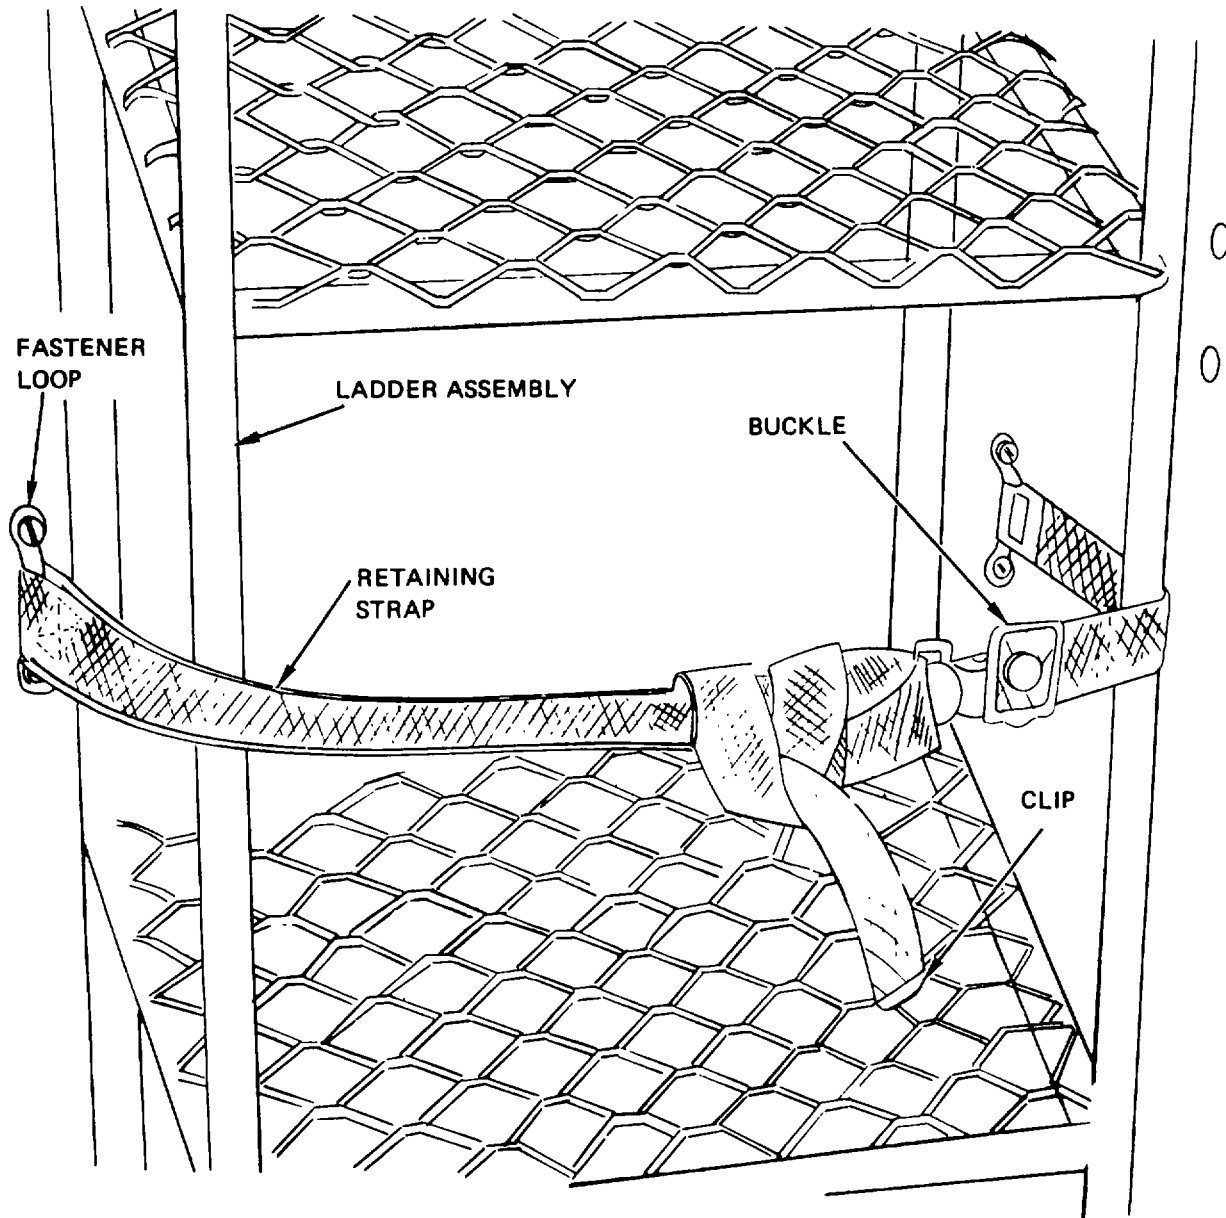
Ladder Assembly Holddown, Removal and Installation.
